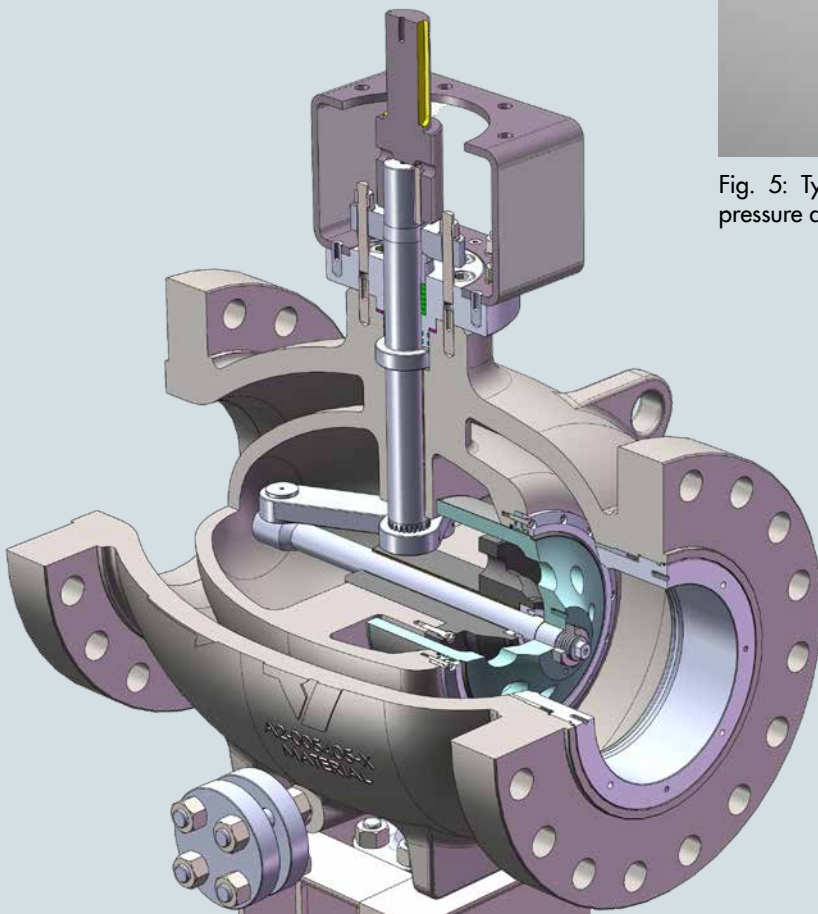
Cutaway view of Type 3599, rotary to linear system
